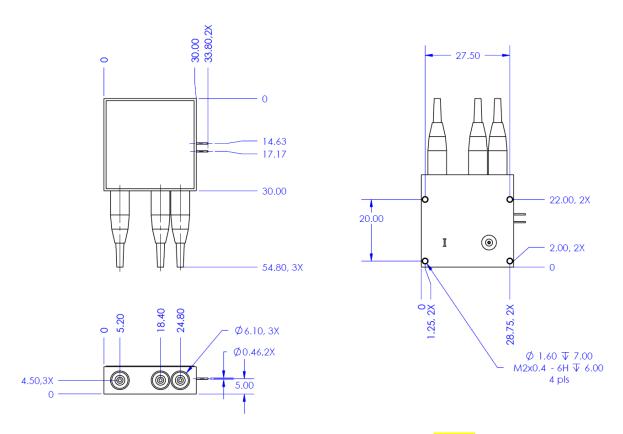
, Mechanical drawing of 10G DPSK DLI, Type-M
